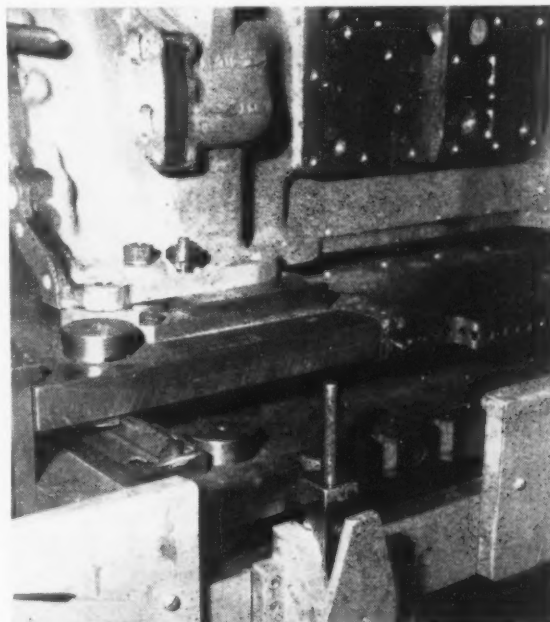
Difficult back spot facing of flange holes is simplified by longitudinal and transverse indexing of the fixture on which casting is mounted. Note spring detent center.
